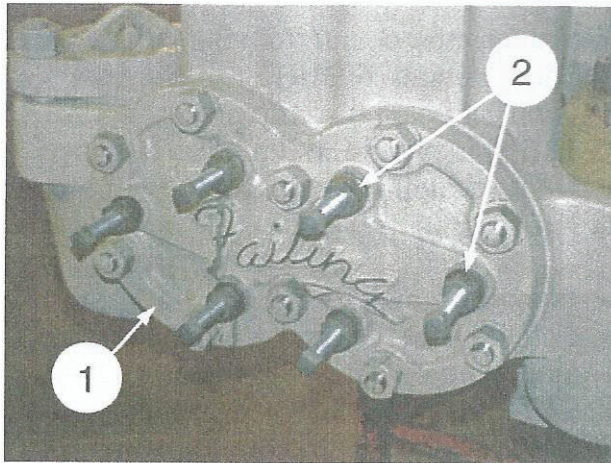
Cylinder head [1] with liner adjusting bolts and lock nuts [2].
